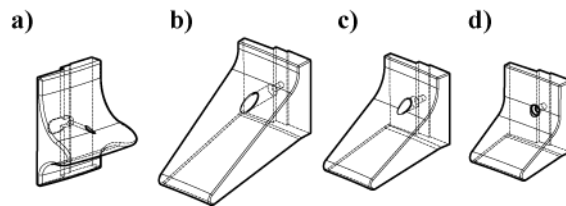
CAD drawings of graphite tiles for (a) the inner wall and the (b) long, (c) medium and (d) short outer wall baffle.
